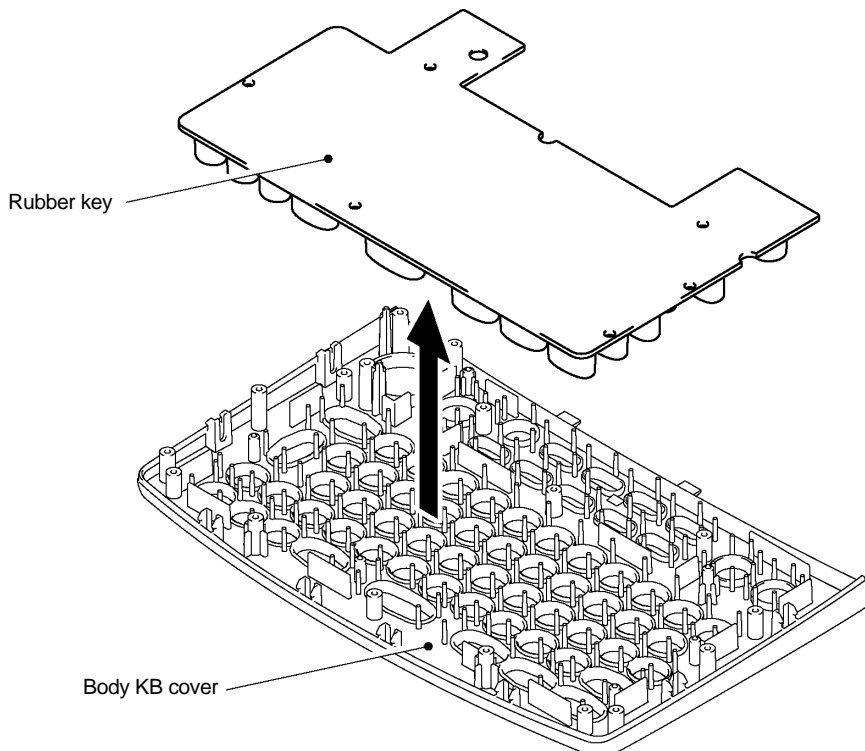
Disassembling the KB Unit/Rubber Key Unit (7)
